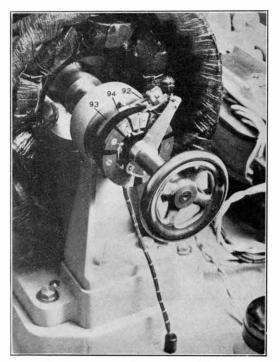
MOTOR AND DISTRIBUTOR (CORRECTING) EQUIPMENT.
